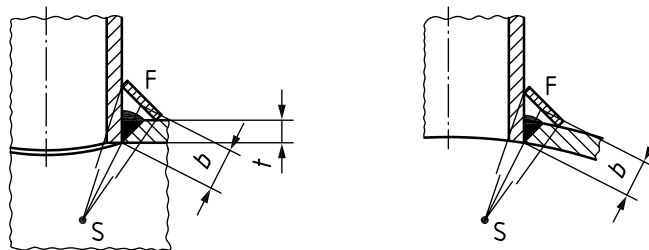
Arrangement for testing of set-in welds with the radiation source located off-centre inside the object and the film outside
